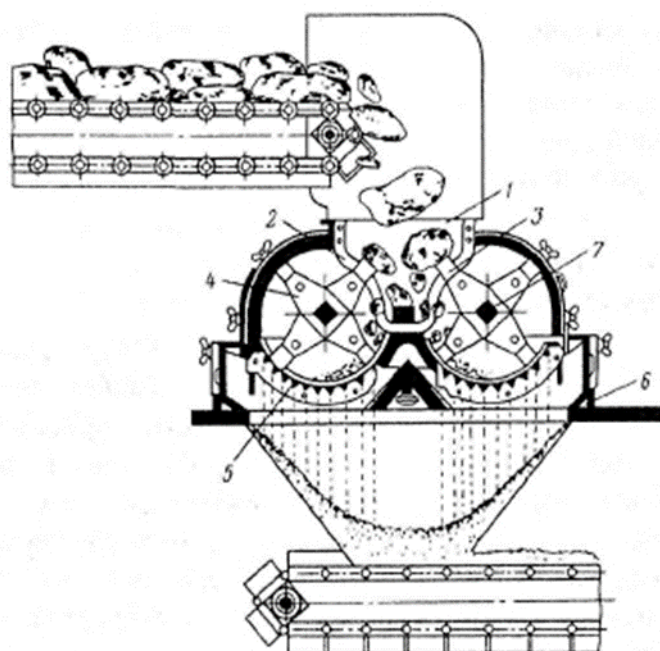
Double-rotor hammer crusher with parallel rotor arrangement:
